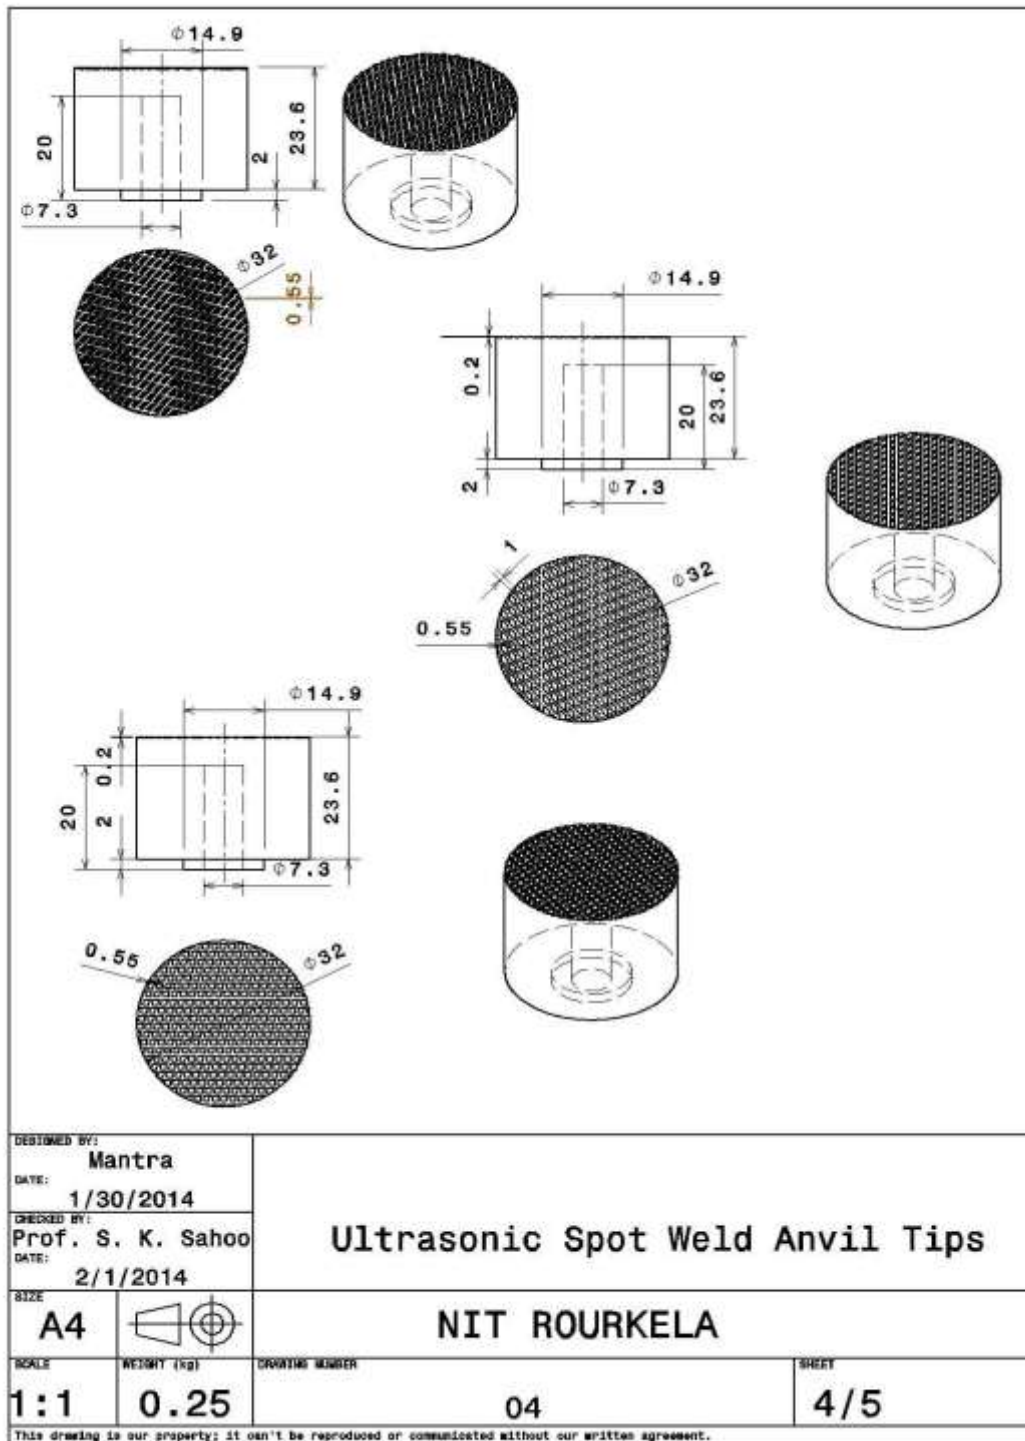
Anvil designs for ultrasonic spot welding
